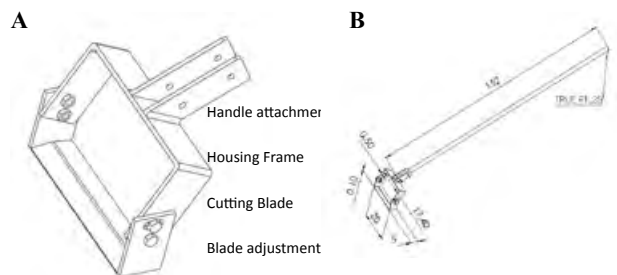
(a) Housing frame and blade of stirrup hoe (b) Dimensions (cm) of the stirrup hoe
